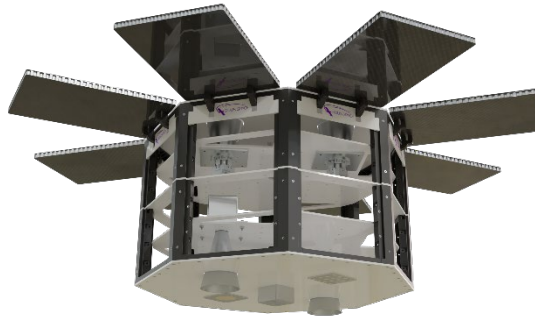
LizzieSat Rendering - Reverse Axis Isometric View, Body Mounted Panels Removed
